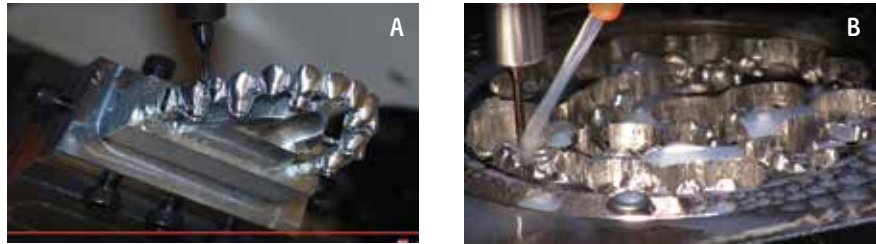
Manufacturing outsourced milling machines. Also in well equipped dental laboratories. These can mill chrome cobalt, titanium and zirconia into complex forms according to the CAD 3D design inputs. Multiple copings crowns and superstructures can be milled simultaneously out of solid blocks of metal
